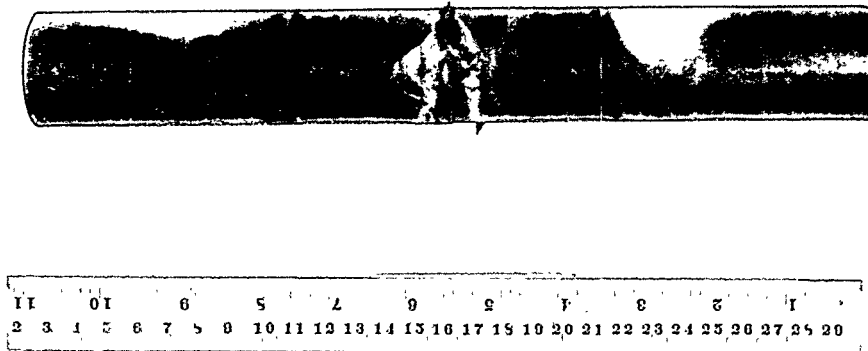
Photograph showing tube-to-tube joint between two 2.5" OD x 6" long SiC Tubes.
